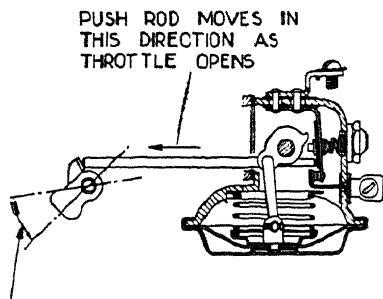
VACUUM SWITCH MOUNTED ON CARBURETTOR CONTROL—ENGINE NOT RUNNING
